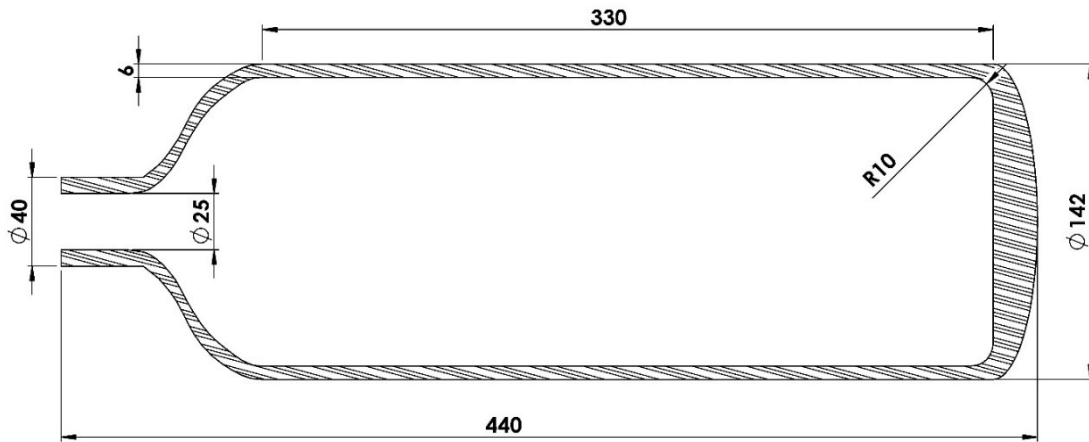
Technical drawing of purchased Al-6061-T6 vessels
